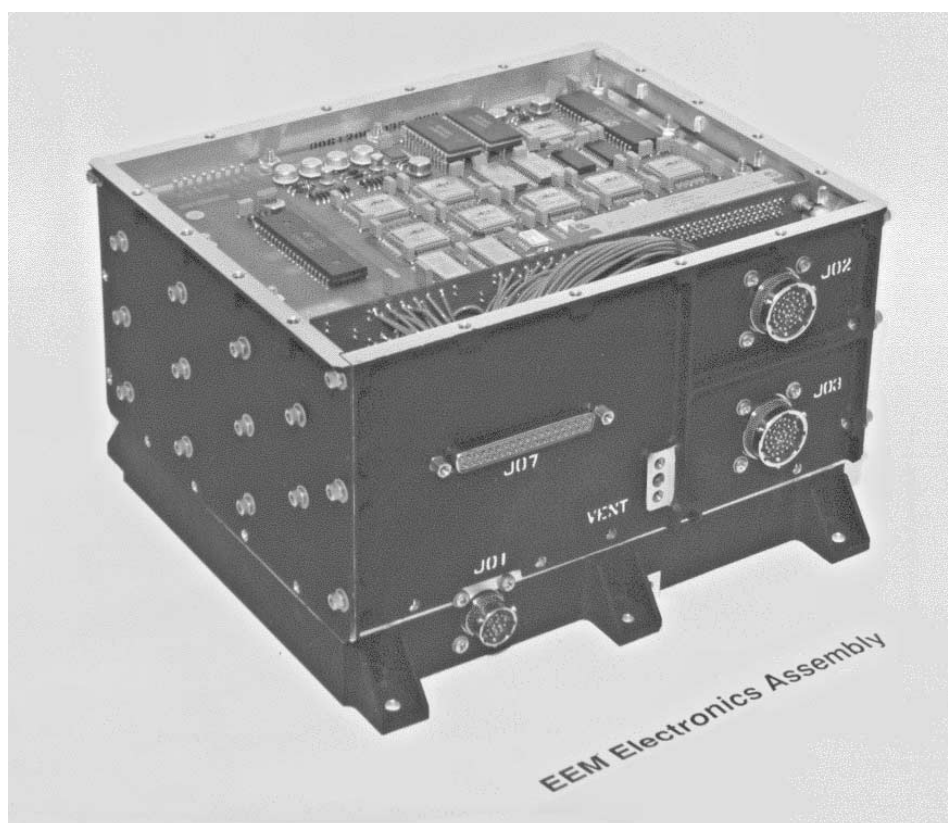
The Electronics Assembly box with the lid removed showing the Data Compressor board at the top of the stack of electronics boards.
